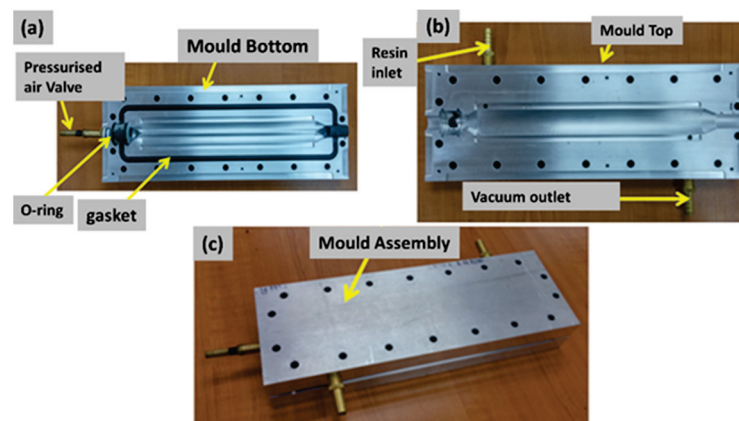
Mold design for manufacturing a tubular section (a) bottom mould (b) top mould (c) mould assembly.
